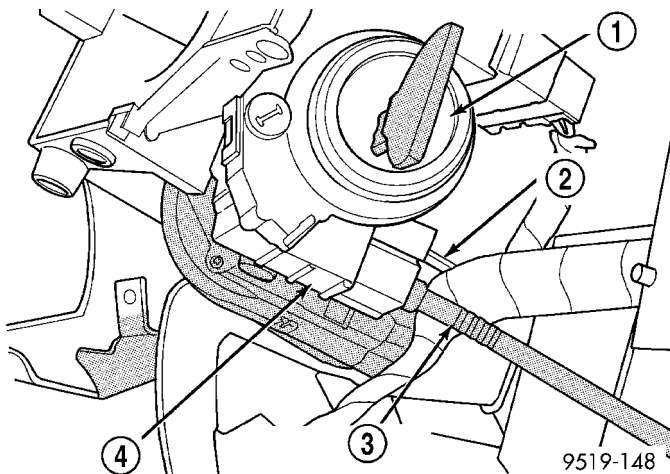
Shifter/Ignition Cable At Lock Cylinder Housing
